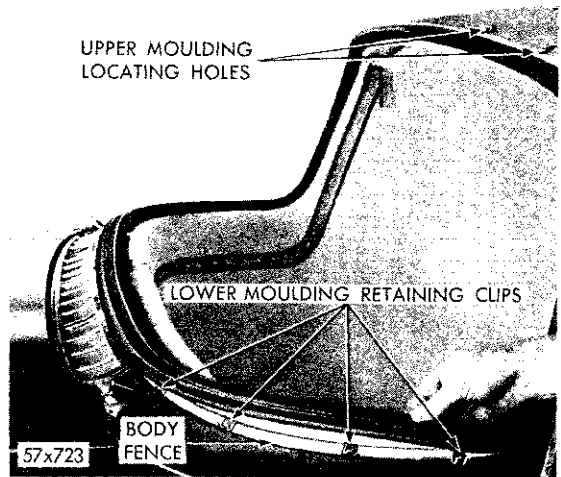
Windshield Weatherstrip and Moulding—Sides
